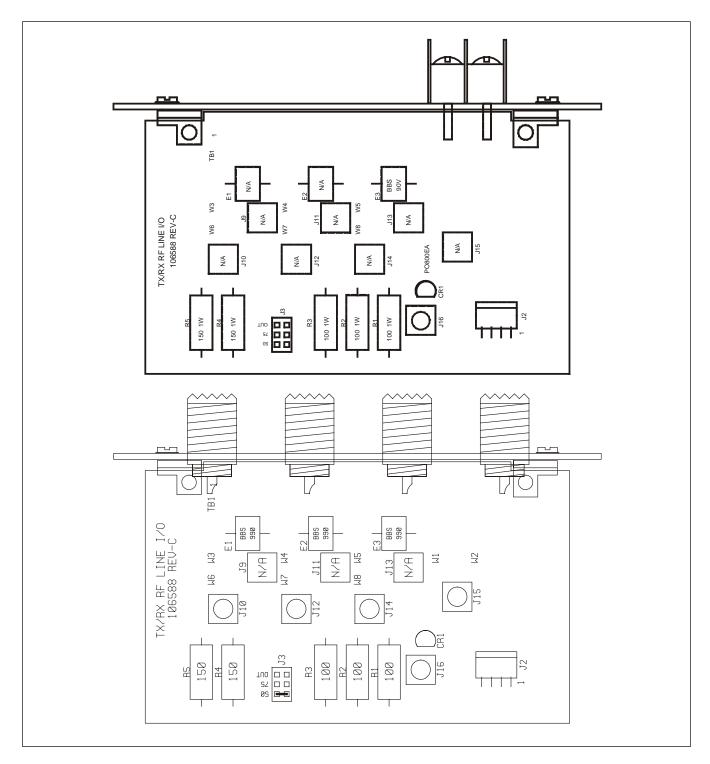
Component locator drawing, TX/RX RF Line I/O module (106585-9)
